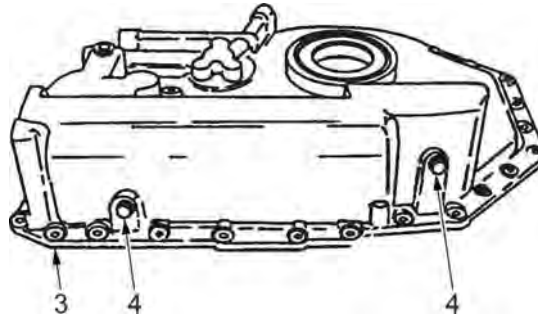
Pipe Plugs, Left Cover Assembly, Removal, View 3.
